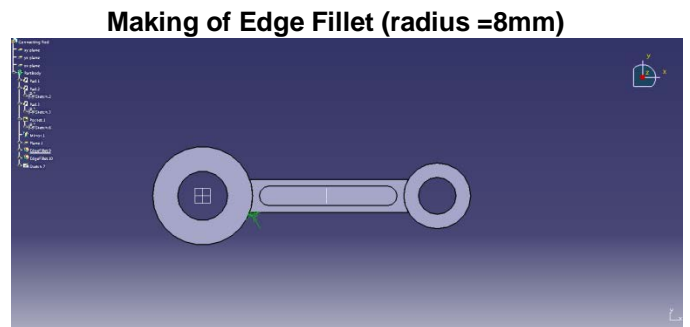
Edge Fillet Sketch (radius =8mm)
